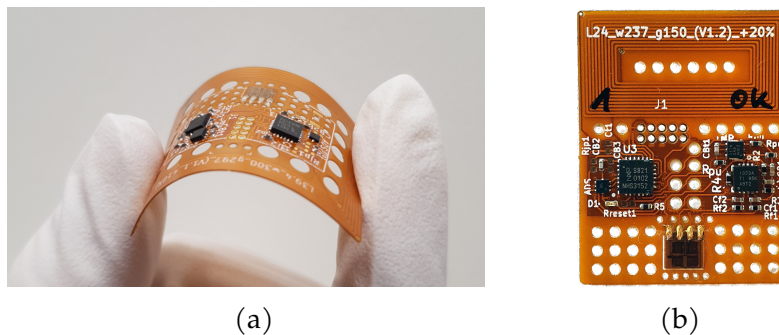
a) Fully fabricated, flexible sensor tag. b) Smaller version prototype of sensor tag (not to scale with left image).
